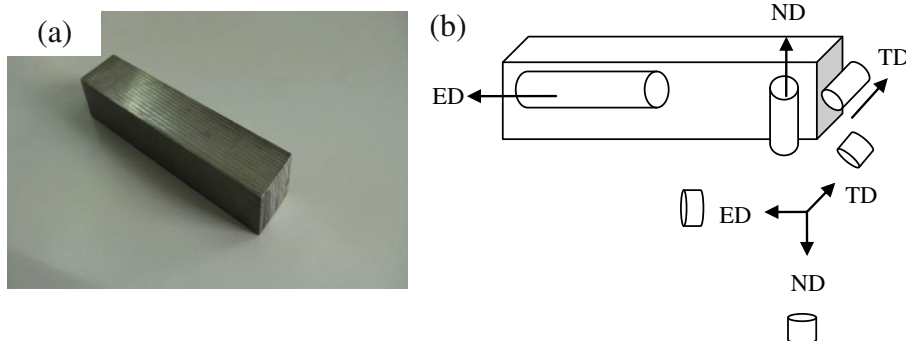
(a) Photograph of extruded section; (b) extrusion direction of samples.
